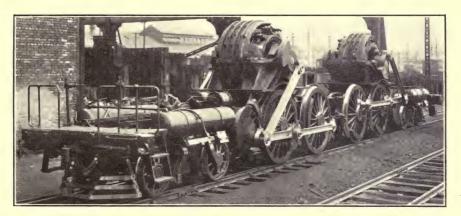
Pennsylvania Railroad. Running Gear of Locomotive.
